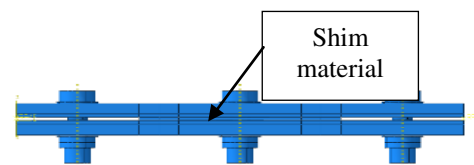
(b). FE model of composite-aluminum bolted joint compressive model with a shim.
